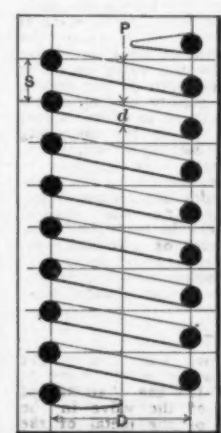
Section of a valve spring which is used in connection with the tabulation in Fig. 14, showing the proper use of springs to use
